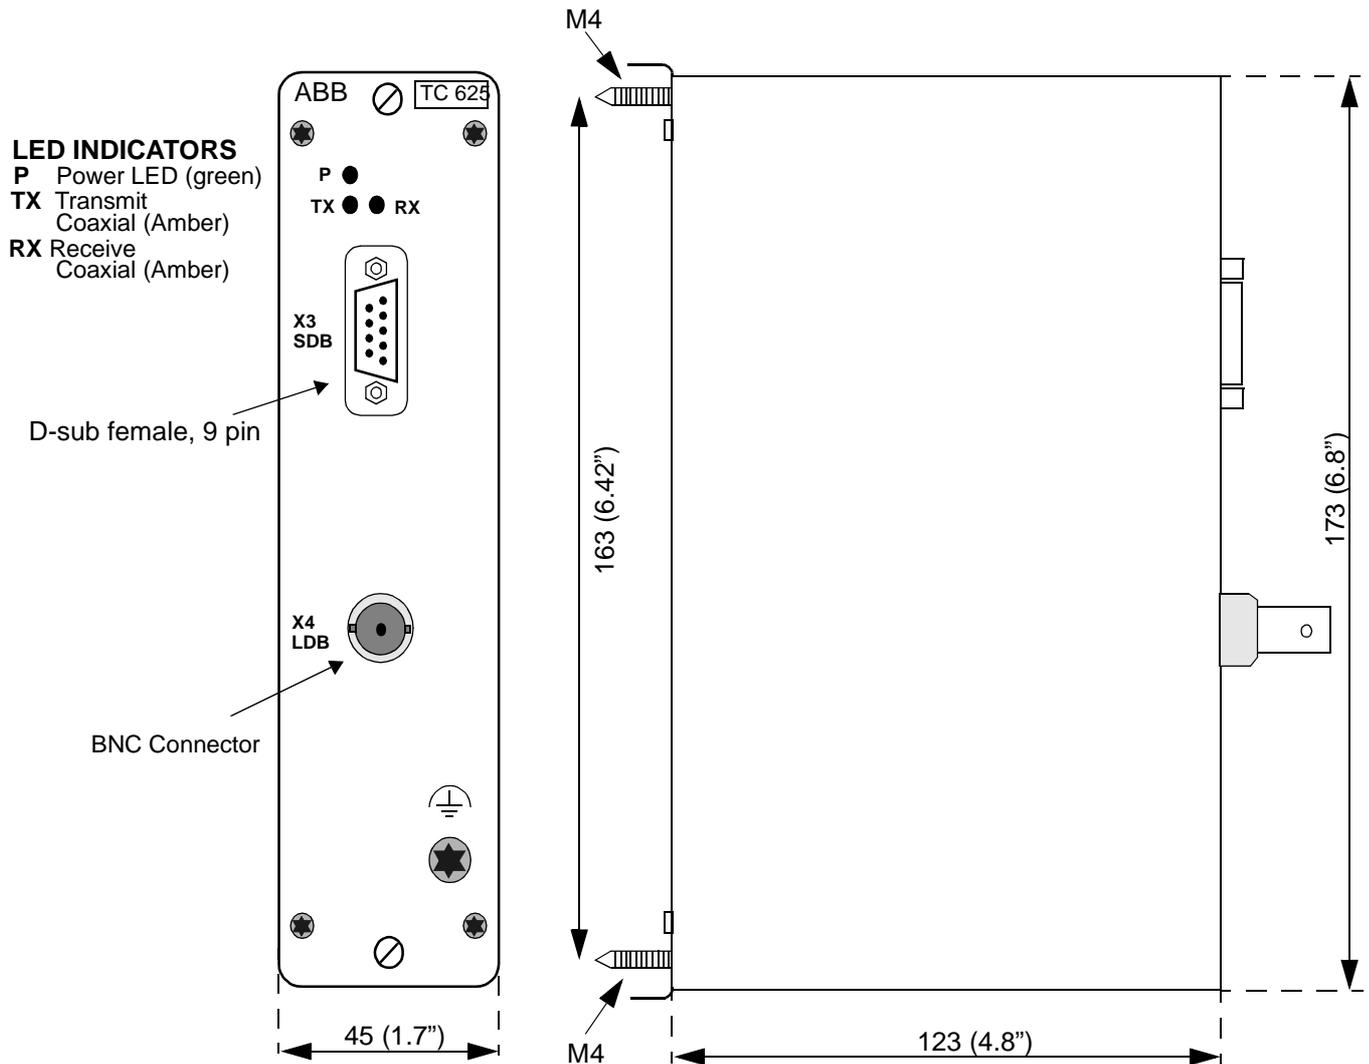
TC625 Coaxial Cable Modem - measurements in mm (inches)
